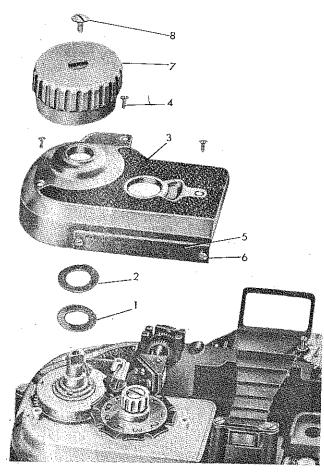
Counter Dial Housing Complete, Exploded from Camera
